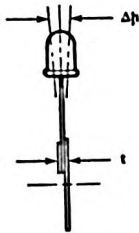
Front to Rear Alignment and Tape Thickness, Typical All Device Types
